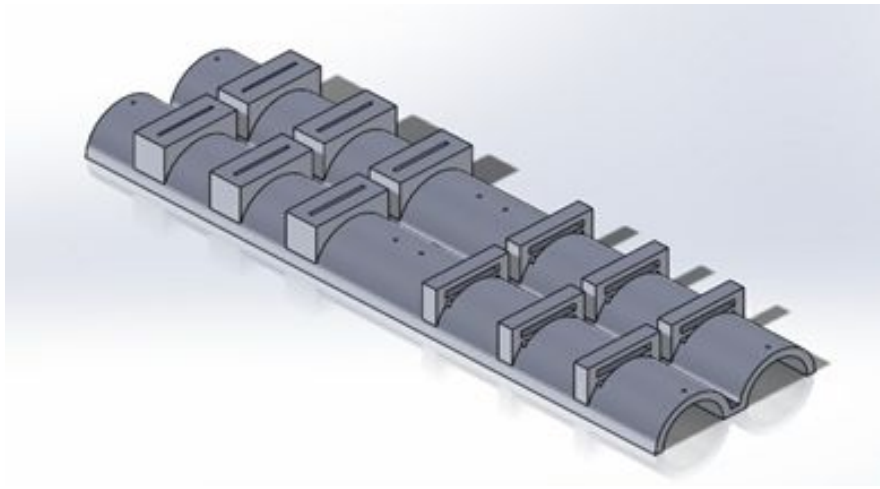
First cutting guide test specimen with one and two sided guide concepts, the part is arranged such that we could maximize the number of guides we can achieve with one 3D print.
